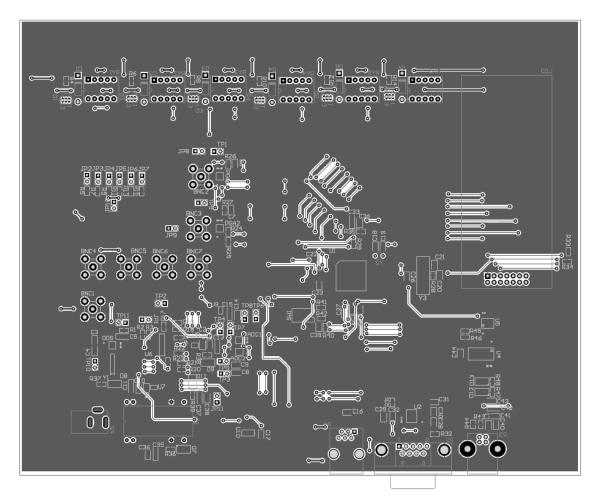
Layout of the PCB of the entire system - bottom layer.
